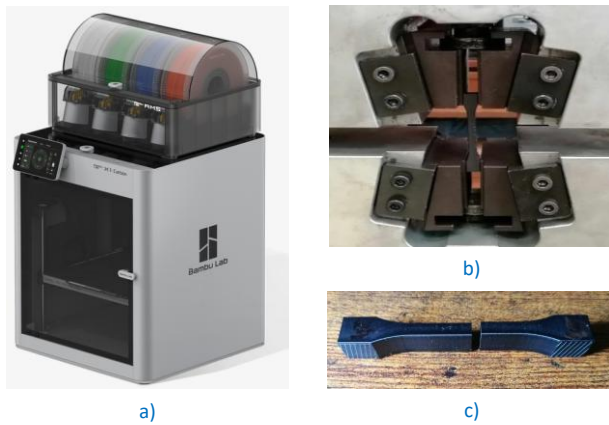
Equipment and test setup: a) 3D printer Bambu Lab X1C [Bambu Lab 2023], b) test specimen clamped in the jaws of the universal testing machine [Kruzliak 2024], c) test specimen after static tensile testing [Kruzliak 2024]
